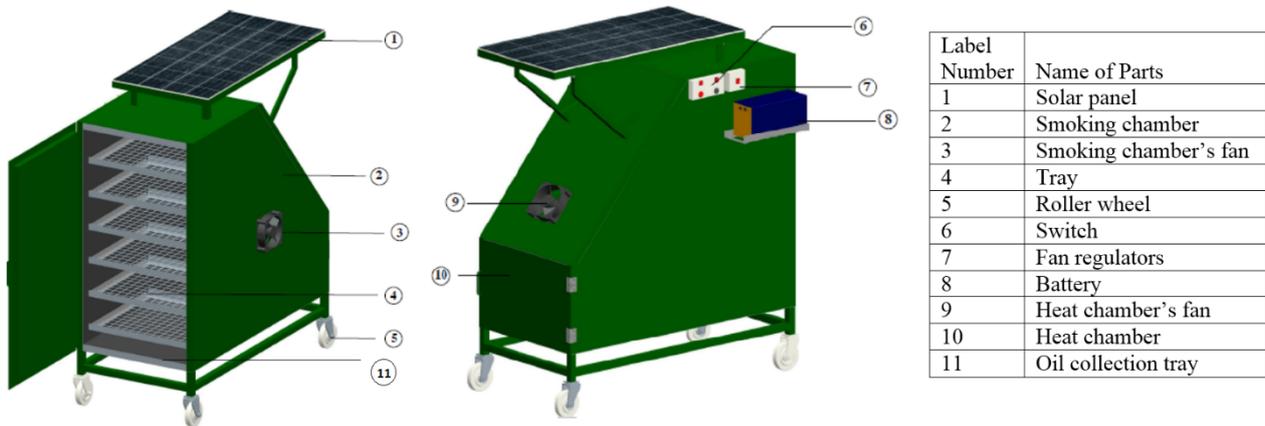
Assembly drawings and parts list of the modified fish smoking kiln
